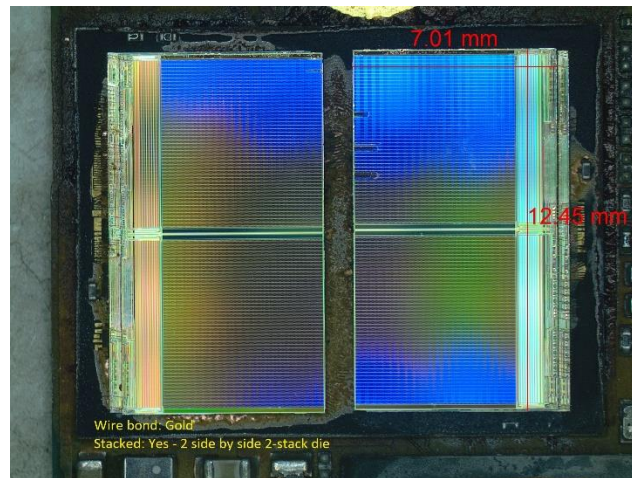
Decapped IC incl. die dimensions, gold bond wires and die stack count
